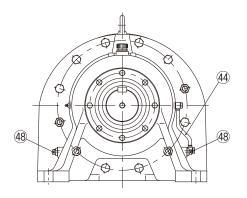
Type CHHM (Horizontal, Gearmotor), 1 Stage Reduction (Example: Frame size 6225)
